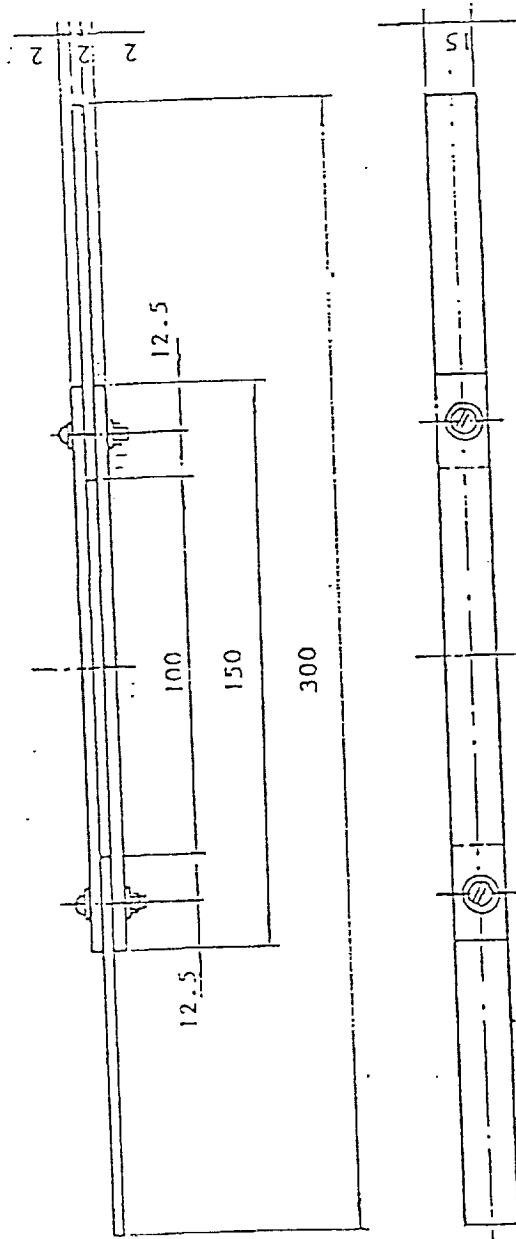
Graphite Epoxy Beam with Bonded Double Lap Joints
